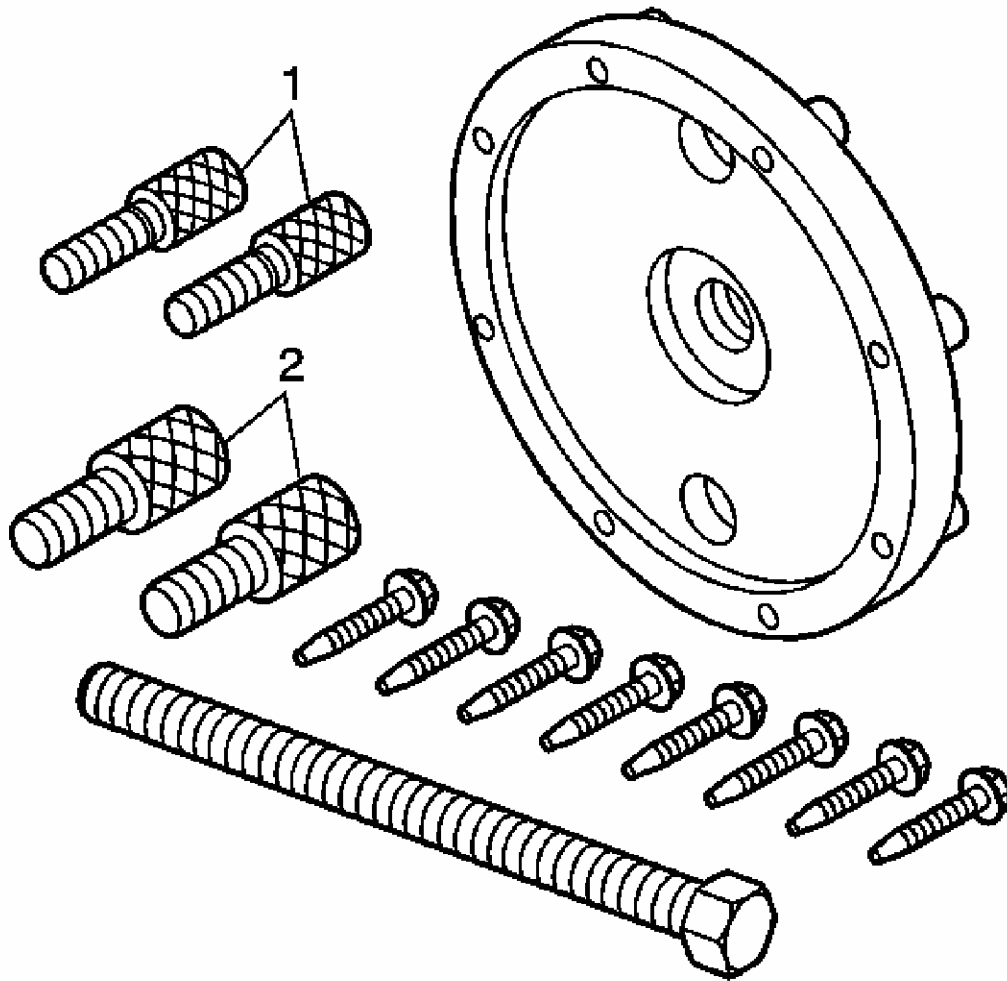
Identifying J 42841 Crankshaft Rear Oil Seal Remover
